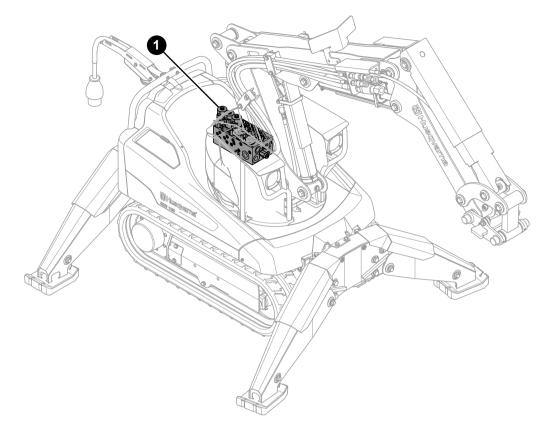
Valve Block Chassis TheValve Block Chassis is mounted on the left side shelf.
